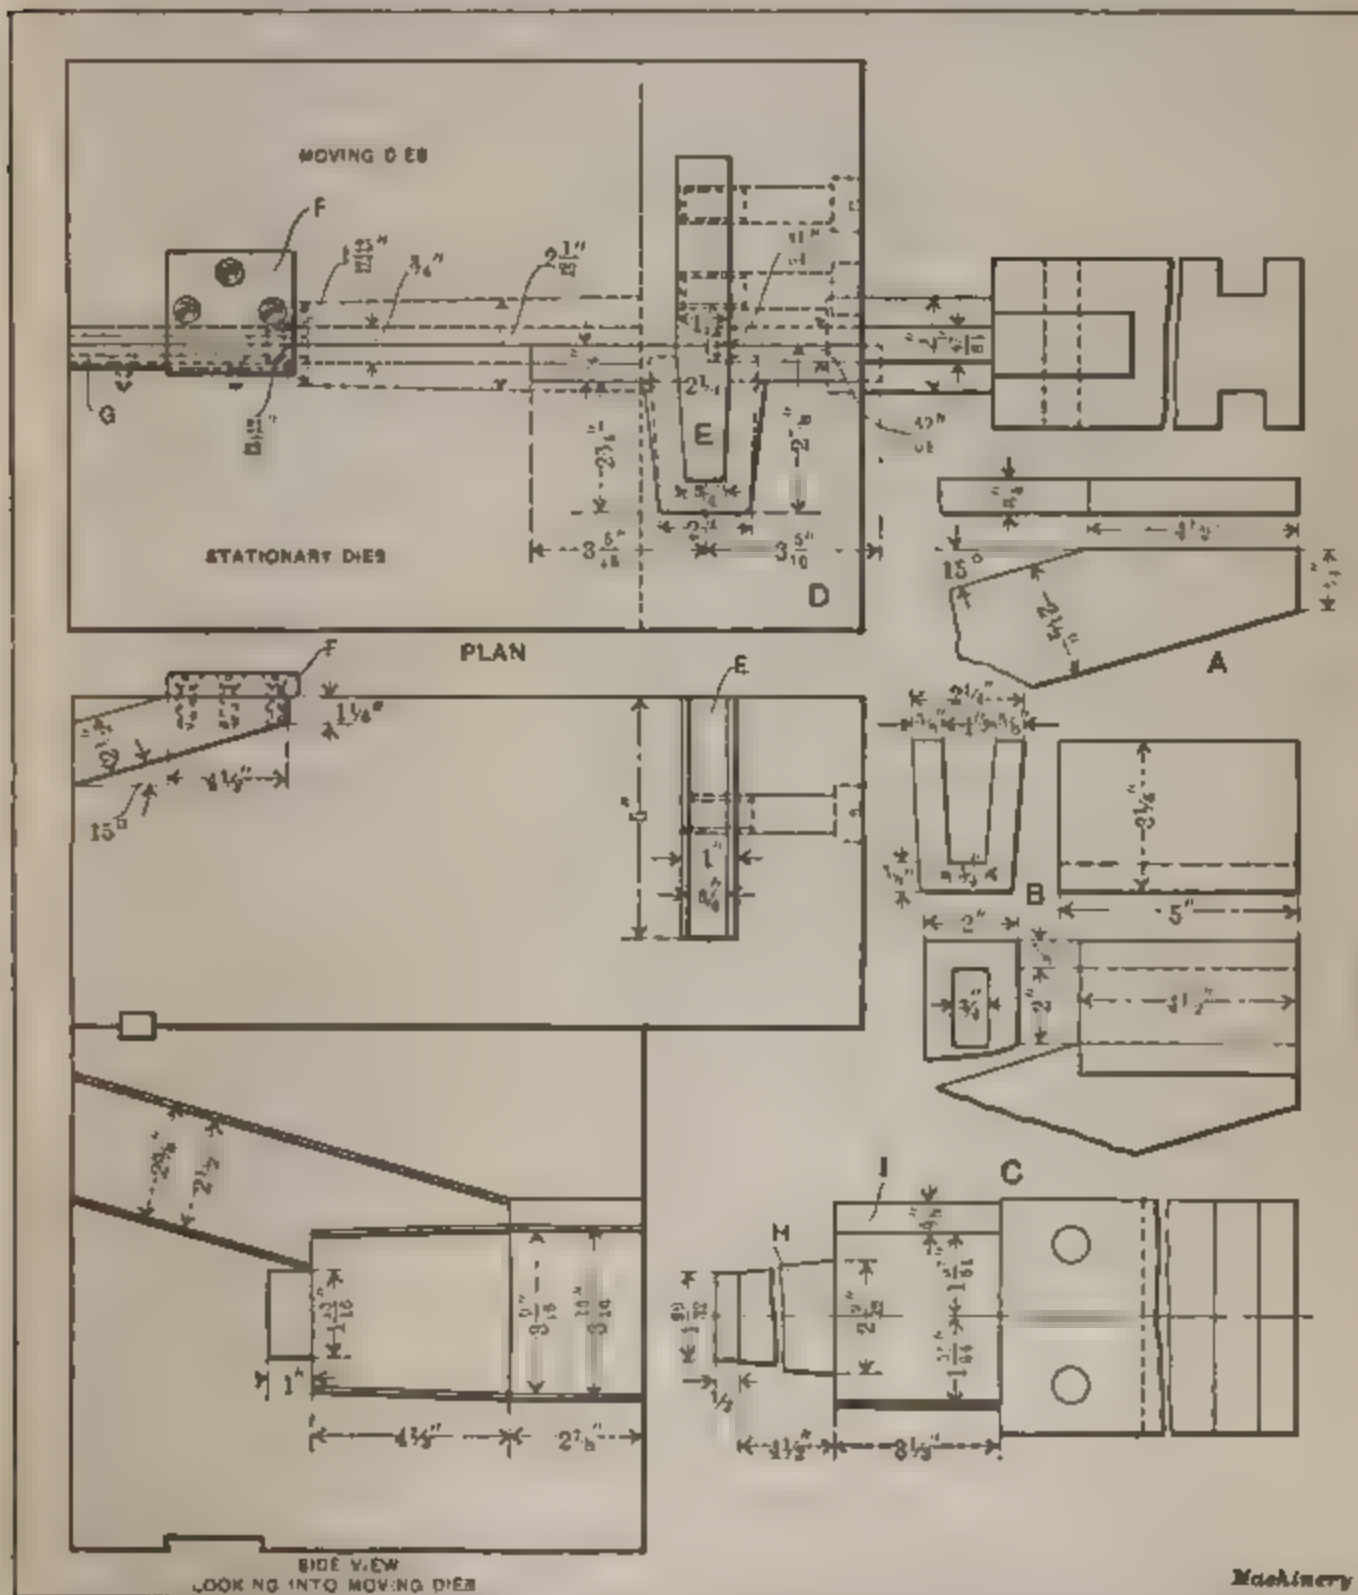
Forging Machine Dies and Tools for making Extension Handles for Grate Shaking Levers
